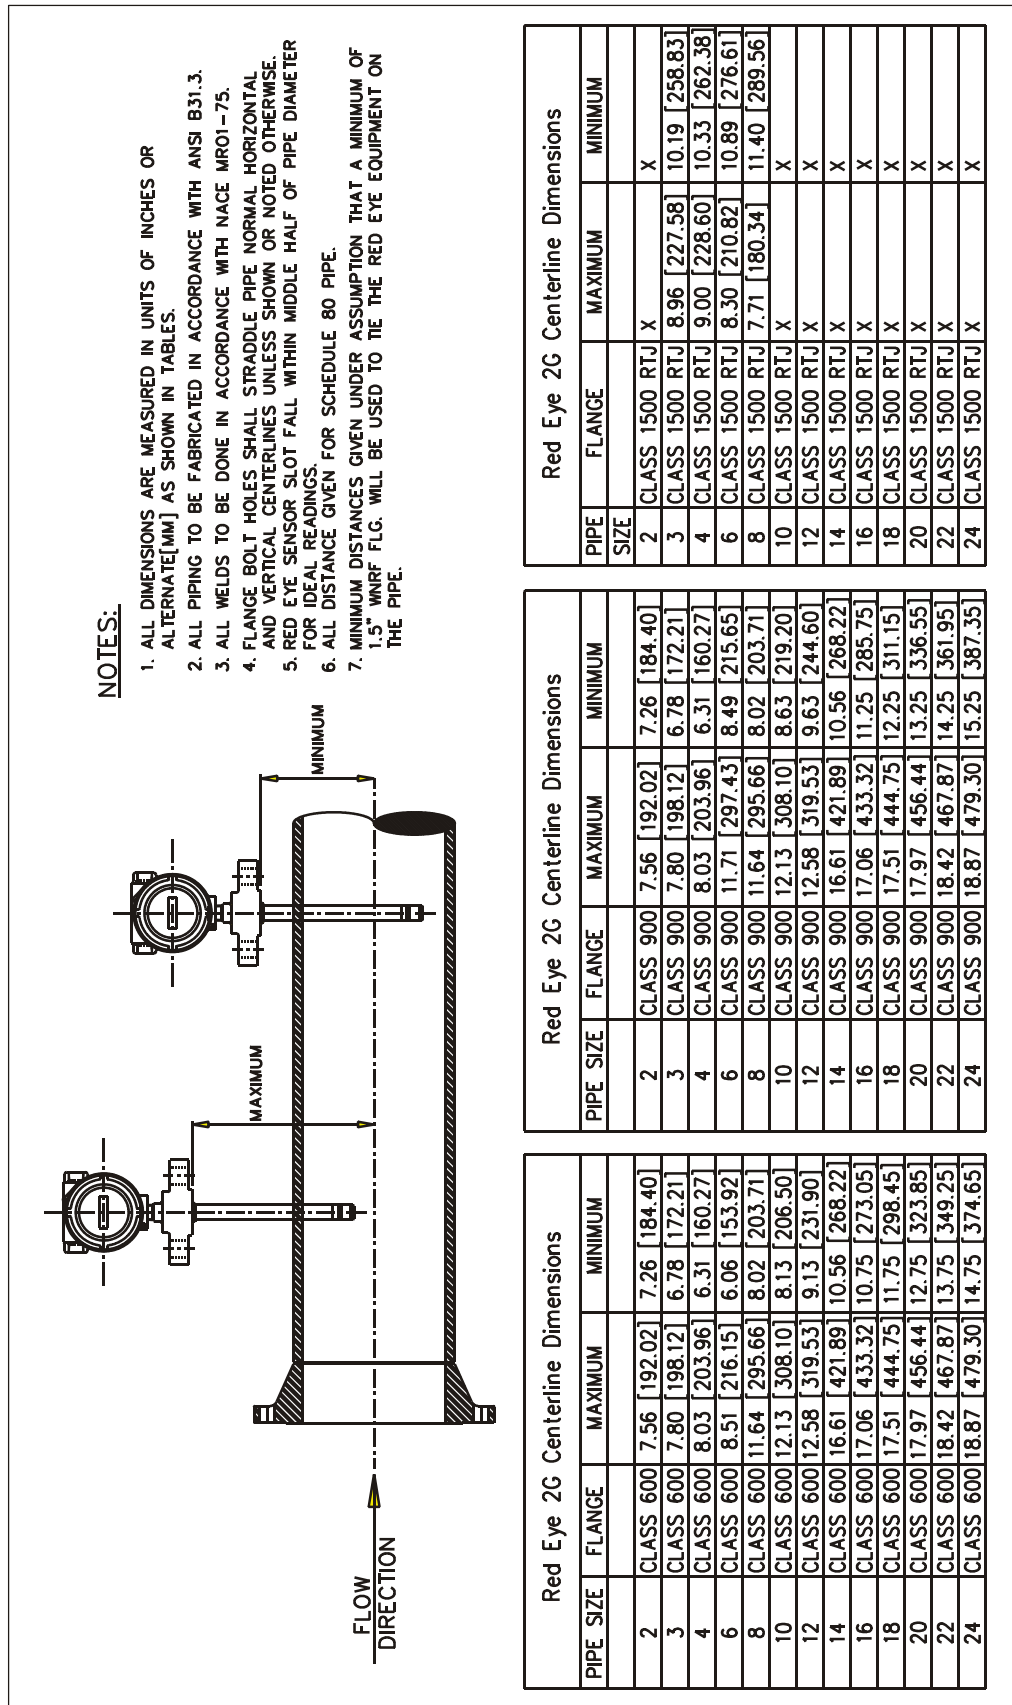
Minimum and Maximum Depth Dimensions for Flange Types
